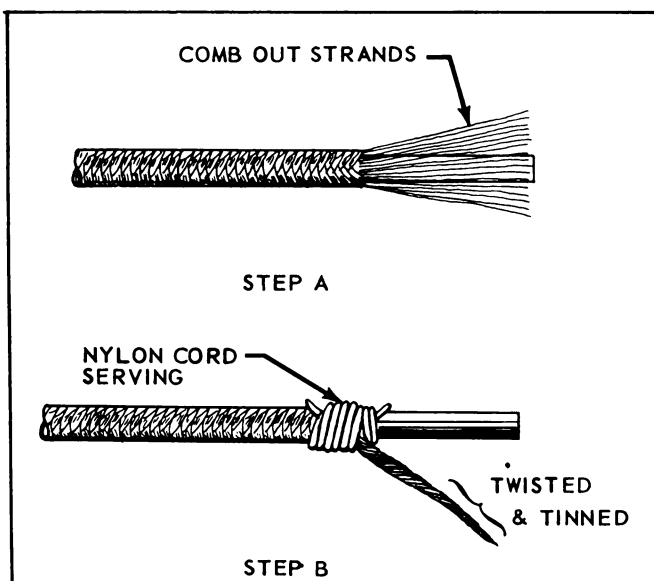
Alternate Pigtail Termination for Shielded Wire
